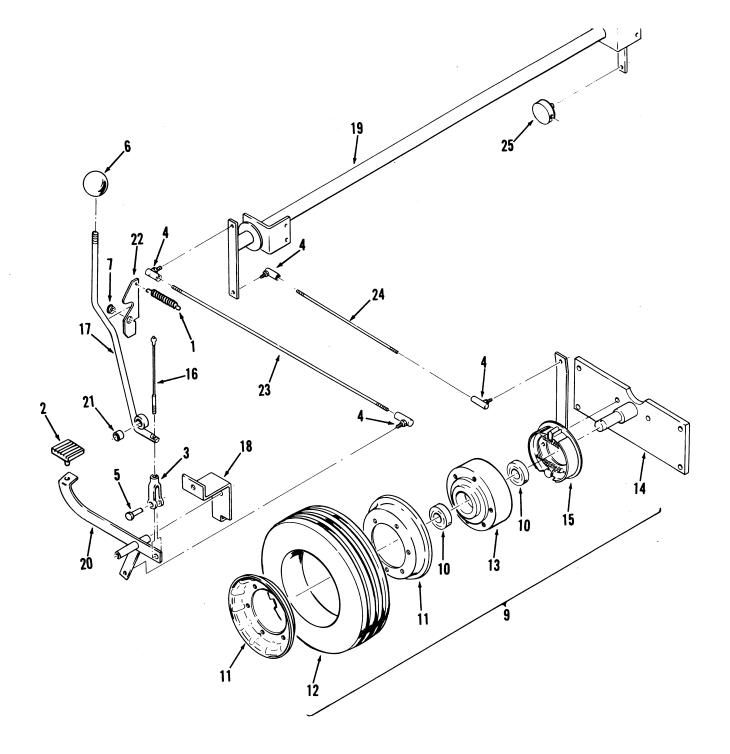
FRONT WHEELS & BRAKE PARTS
